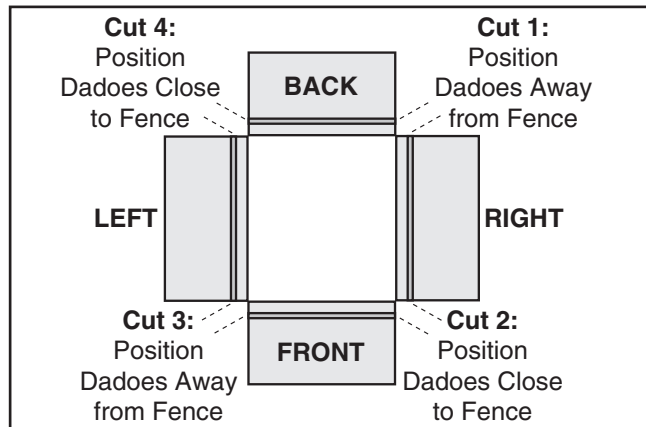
Drawer pieces laid out and marked inside face up; cutting order and workpiece position against fences also shown.
